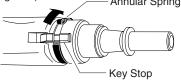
Rotating Annular Spring to Uncover Key Stop
